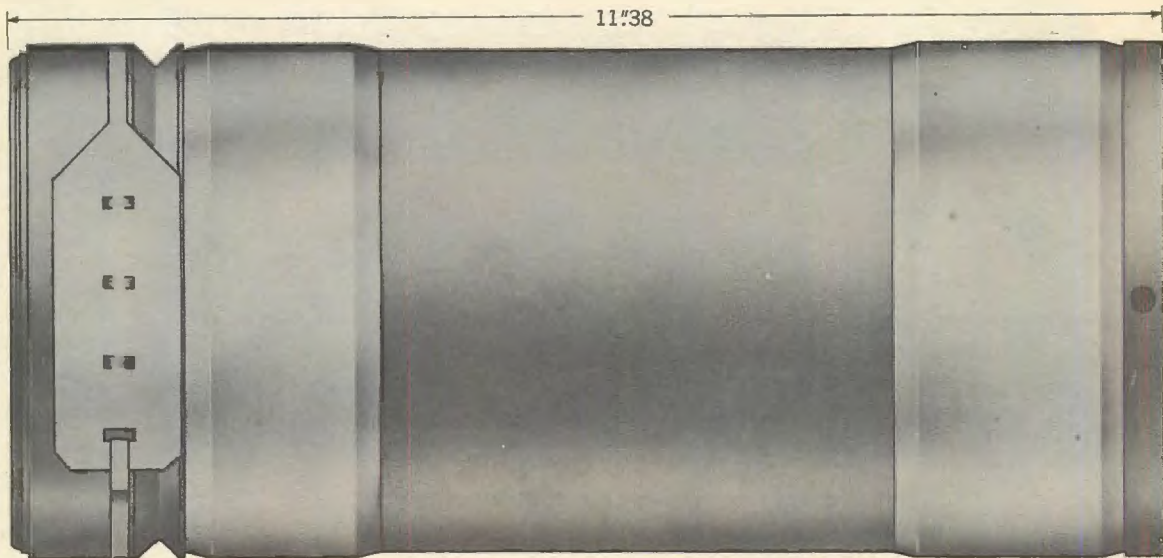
5.0-Inch Rocket Motor Mk 6 Mod 1, External View.
